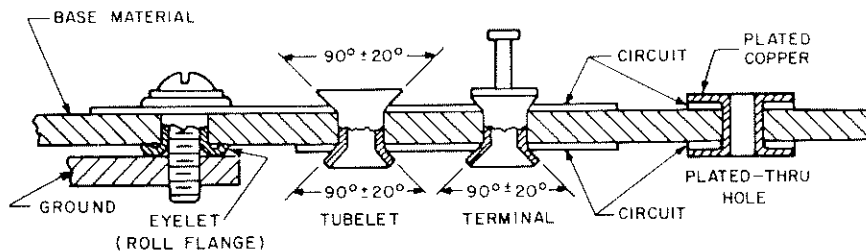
Eyelet, Tubelet, Terminal and Plated-Thru Hole on a Board
